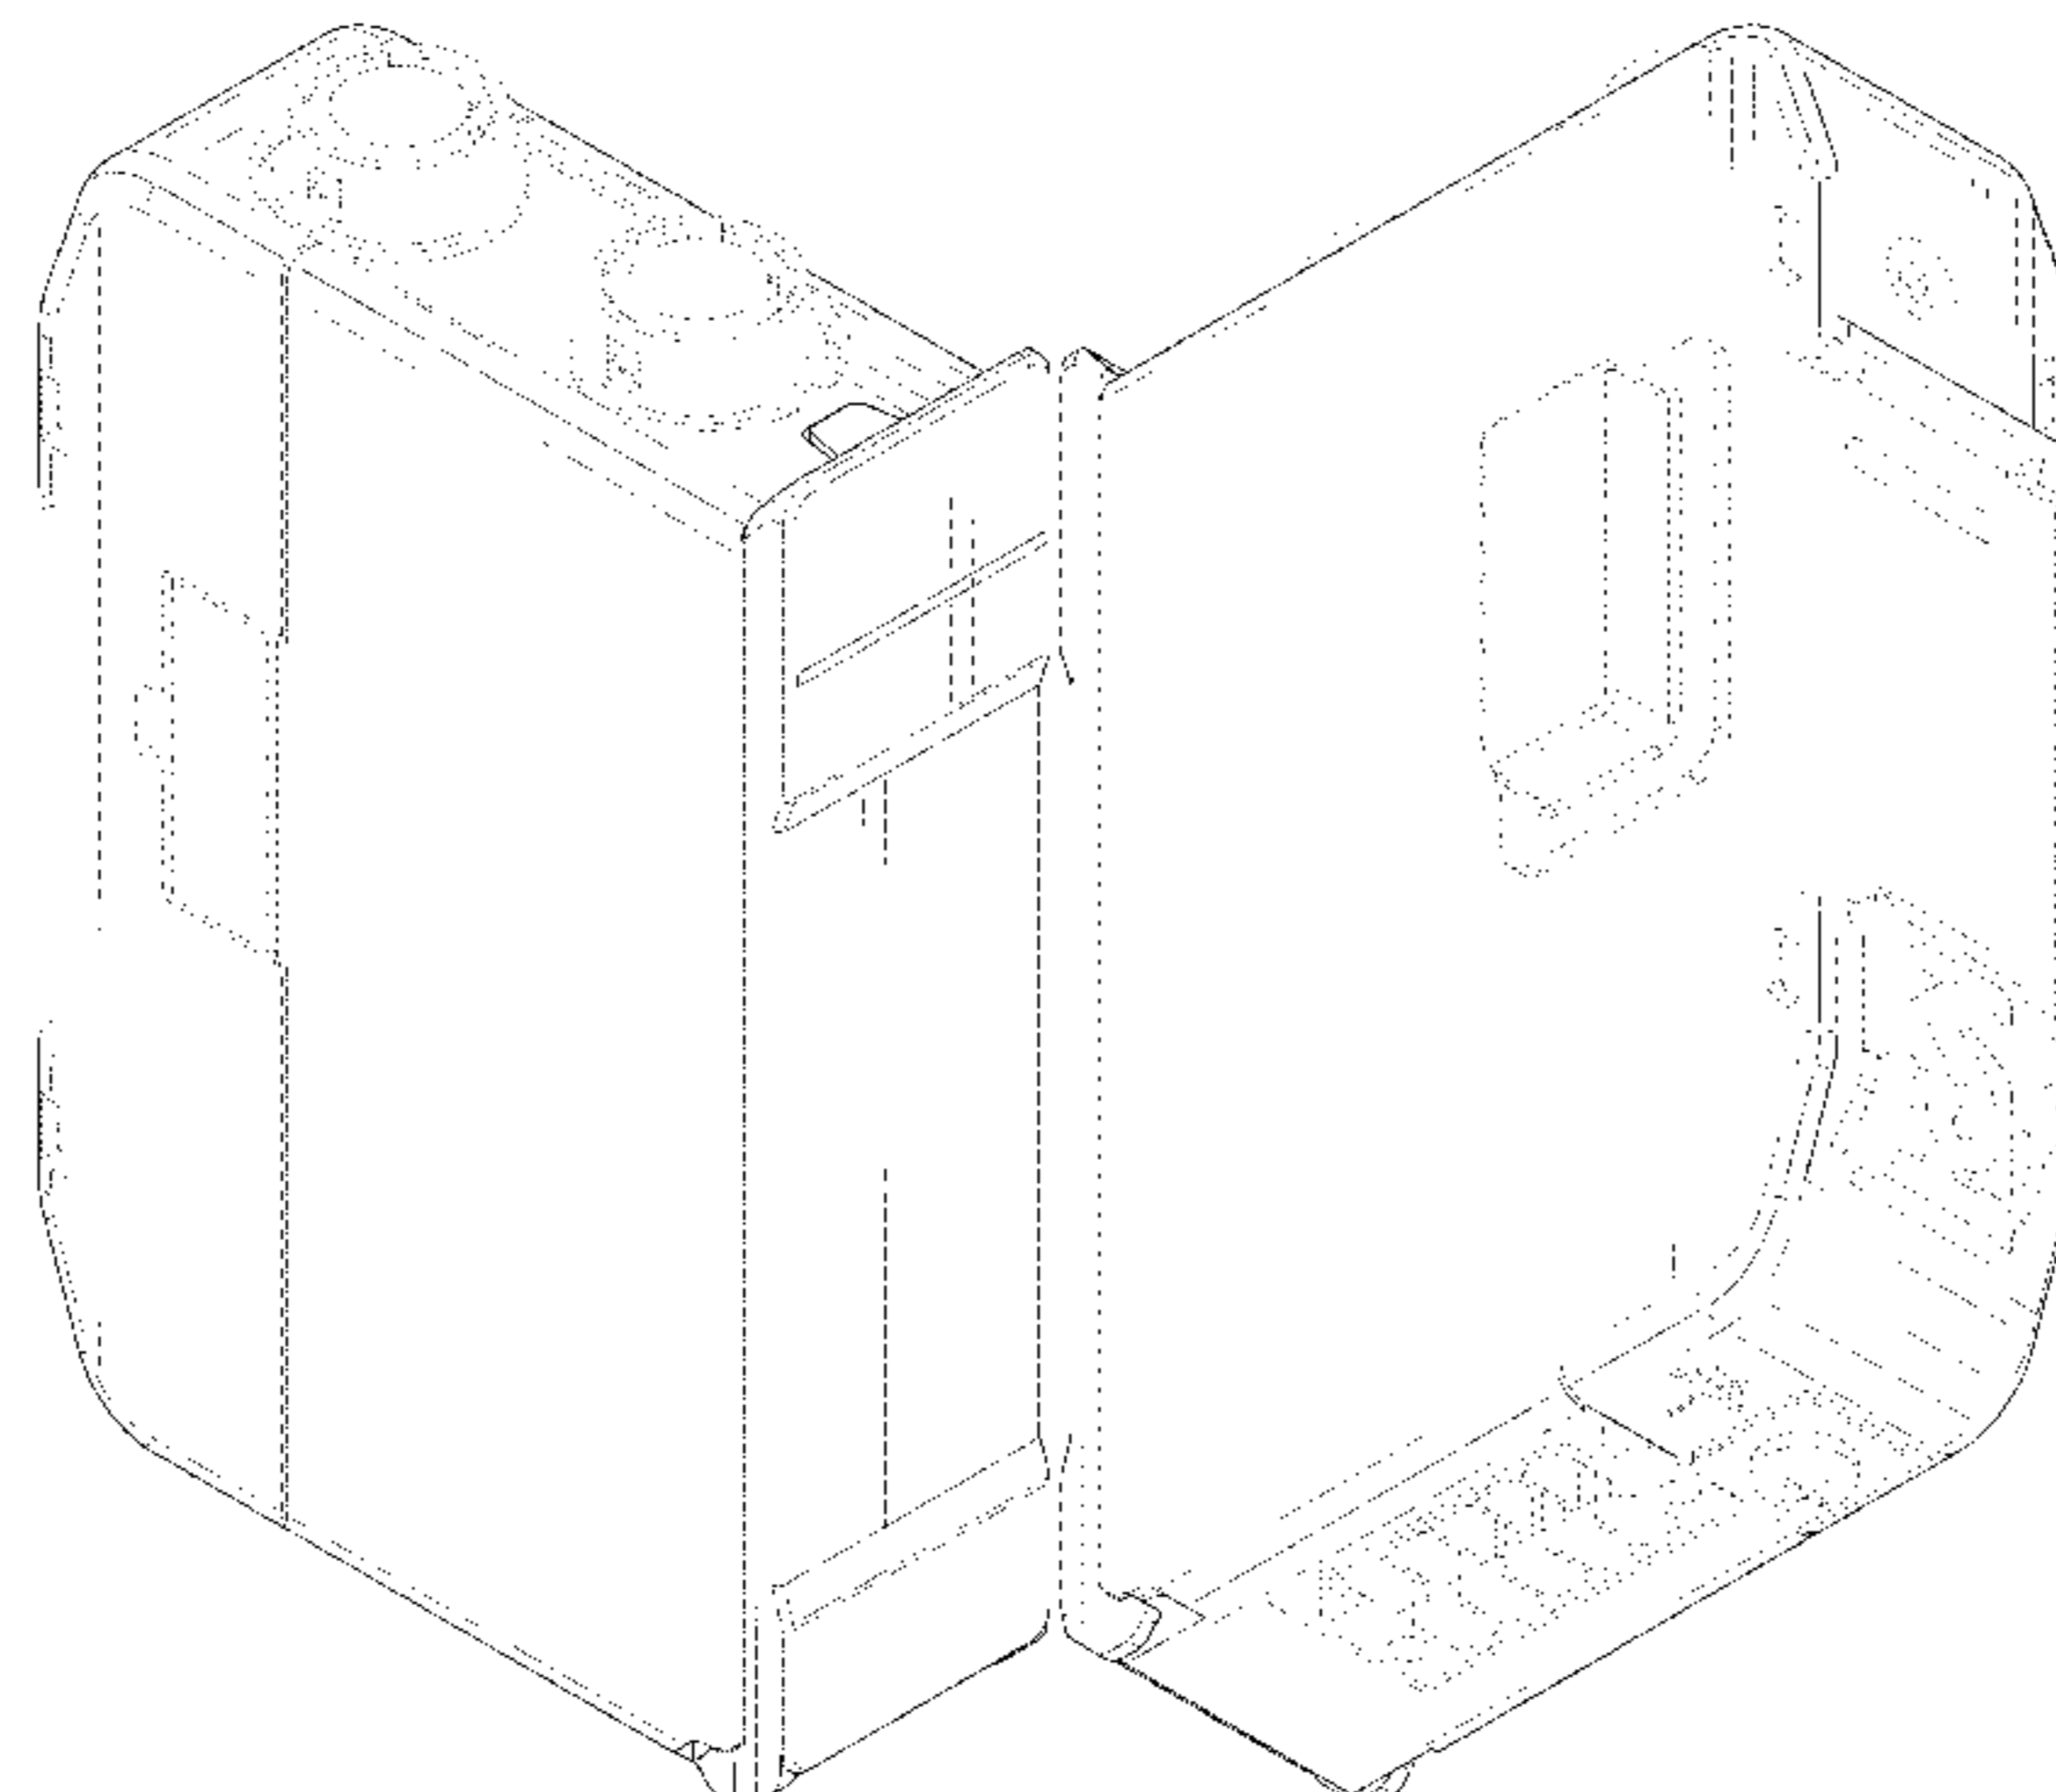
is a rear, right-side, bottom perspective view thereof;
